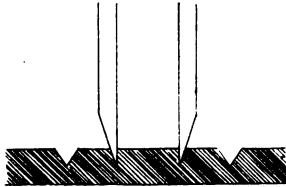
SECTION SHOWING TRENCHES IN OUTLINING.
